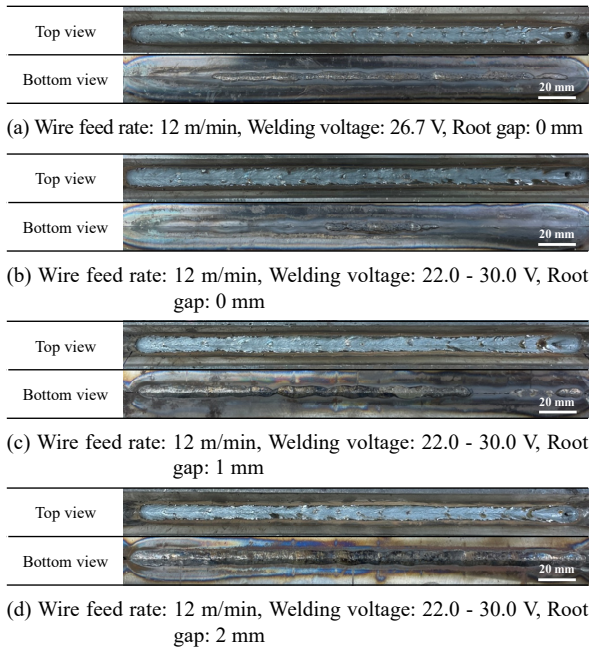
Welding bead appearances according to experimental conditions
